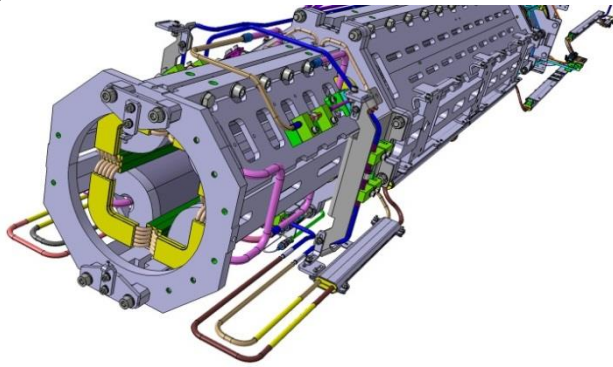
Model of a γ -jump quadrupole inside its frame which is installed on one end of a main quadrupole. The two clamps at the front fix the common vacuum chamber.
